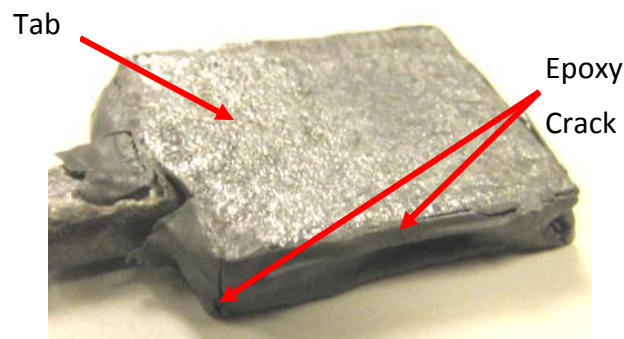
Tabbed Specimen with Cracked Epoxy
